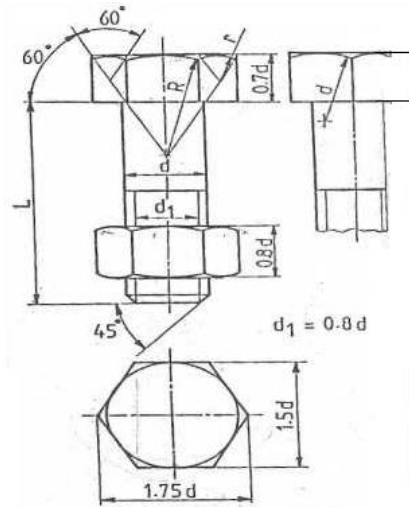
shows the steps to draw bolt and nut and how rules to calculate the illustrated dimensions:
